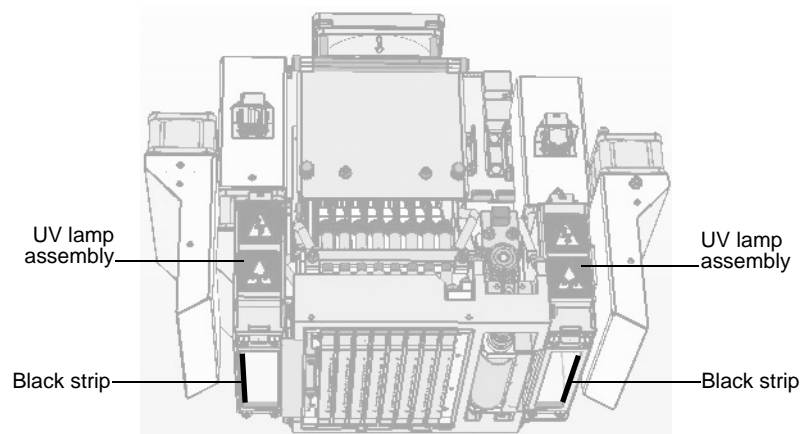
Print block and UV lamp assembly, showing correct placement of black strip
